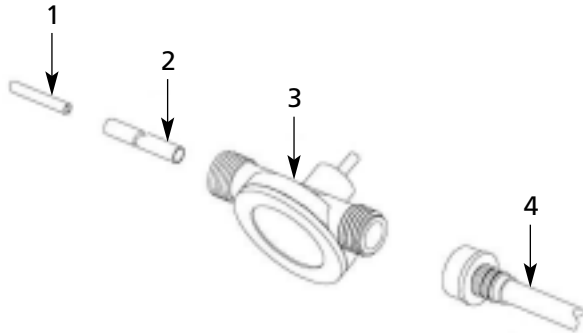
Repair Parts Illustration for Drill Driven Pump
